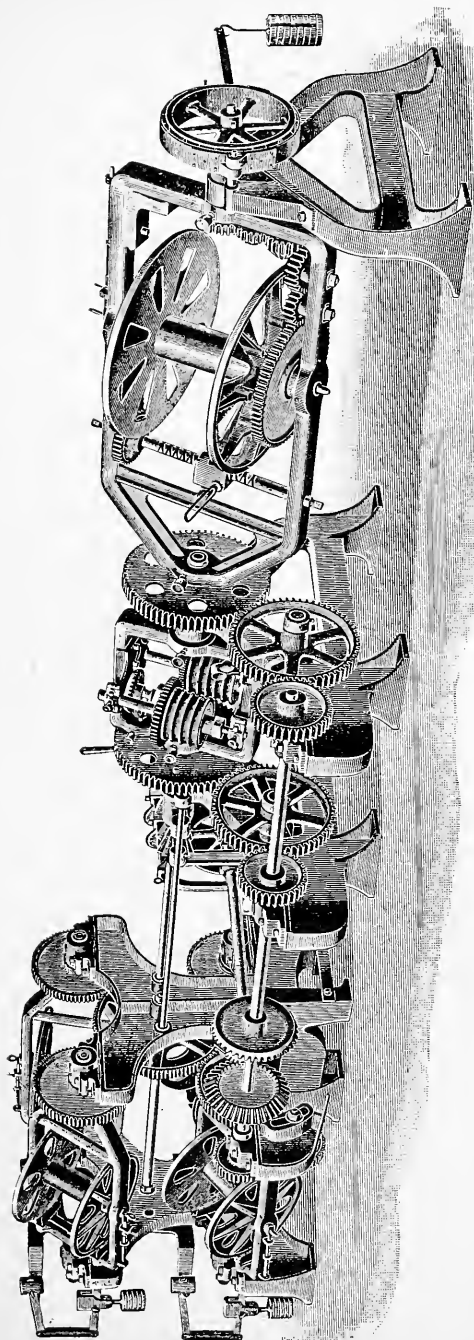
3- or 4-strand layer or closing machine to lay rope from 1 inch diameter to 2 inches diameter.
